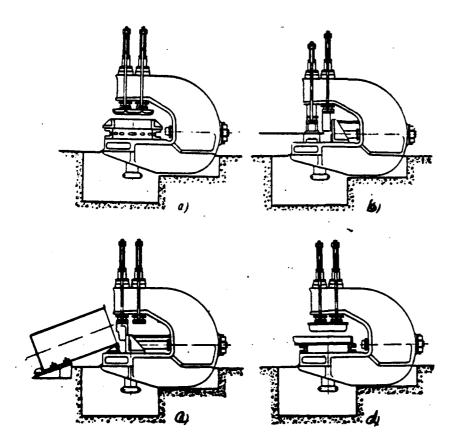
Examples of the use of the single-column hydraulic press: a) stamping bottom; b) flanging of the edge of sheet; c) flanging of the edge of cylindrical container; d) flanging of neck in bottom.
